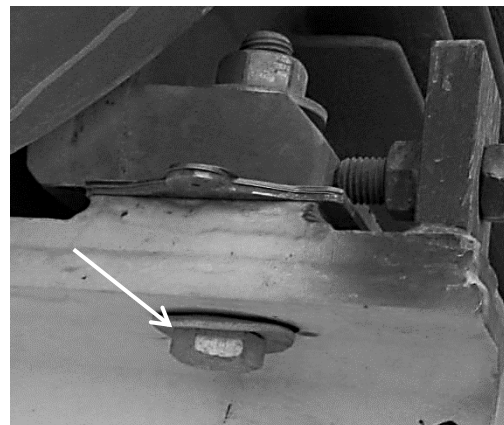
Motor Hold Down Bolts Had Oversize Washers Which Had Deformed Into the Holes.
